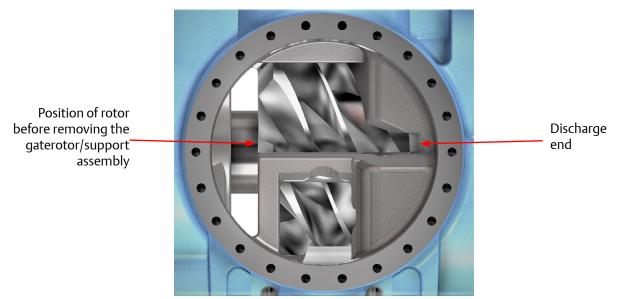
Rotor Position for Gaterotor/Support Assembly Removal
